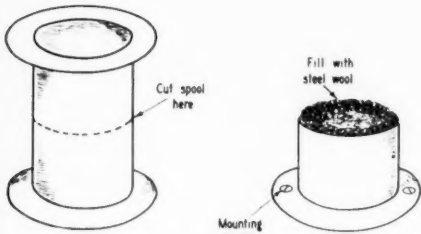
A neat soldering-iron cleaner that is made from an old solder spool.
